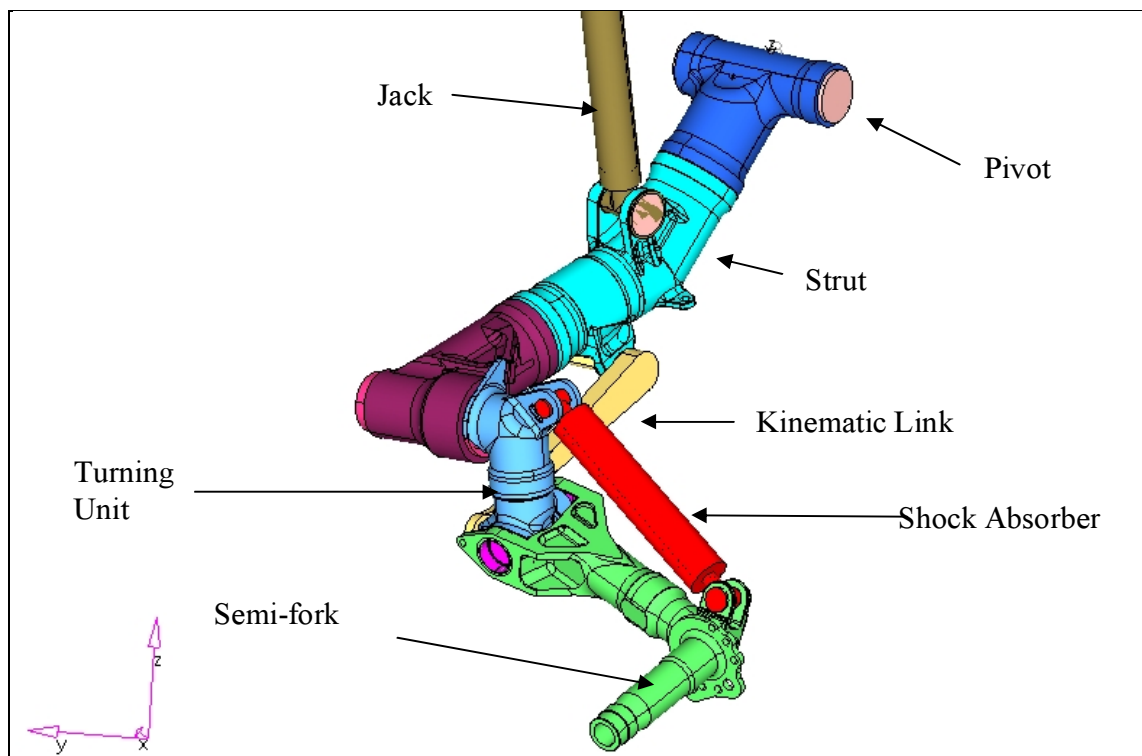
3D Solid Model of Main Landing Gear assembly
